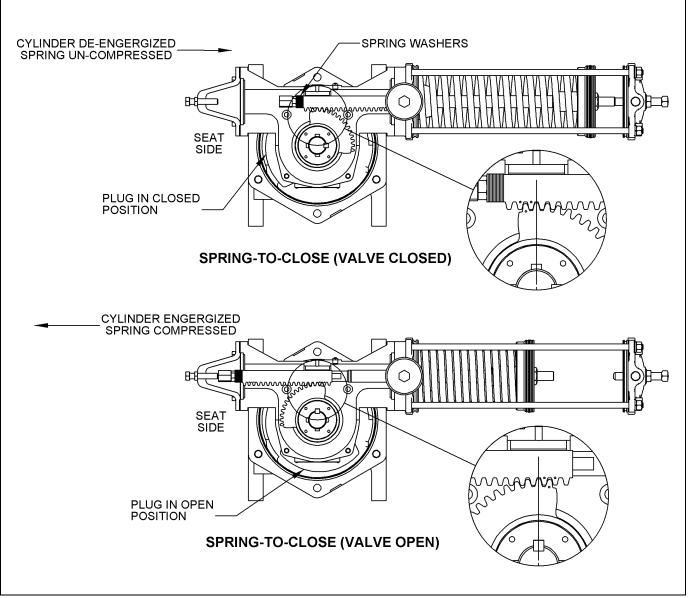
Spring-To-Close Actuator (6A actuator shown)
